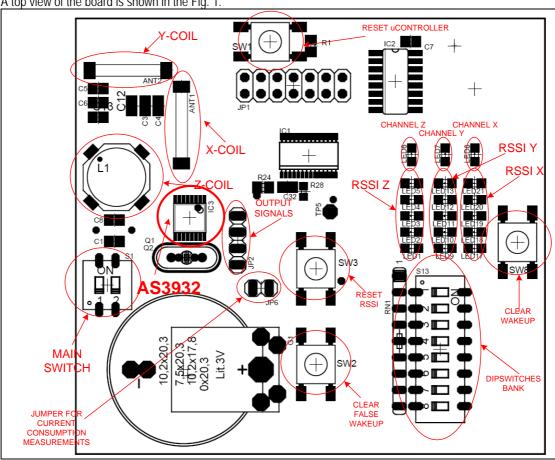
top view of the AS3932 LF Wake-up Receiver demo board
